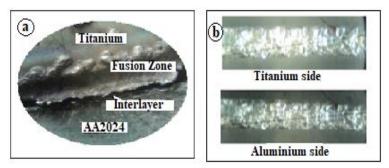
Fracture surface (a) Al interlayer side (b) Ti side and Al side
